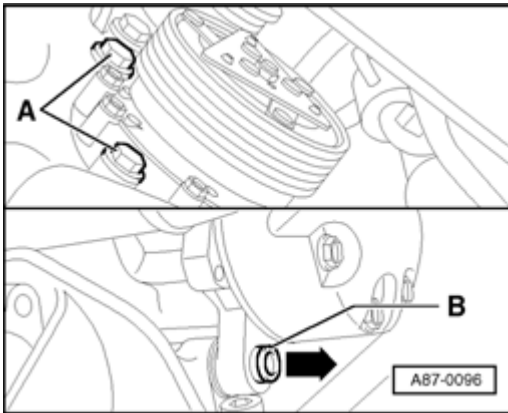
Unbolting A/C Compressor & Pressing Sliding Bushing Back Into Hole
